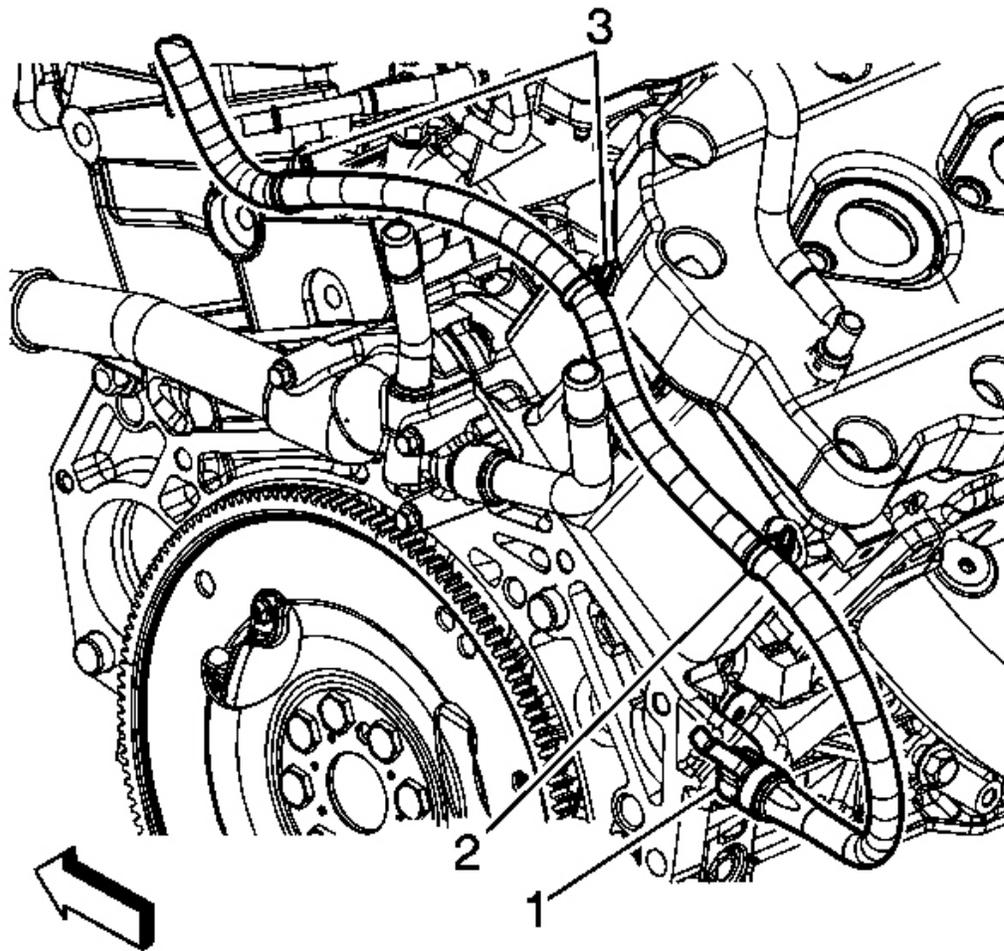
Identifying Coolant Heater Cord Clips & Coolant Heater
